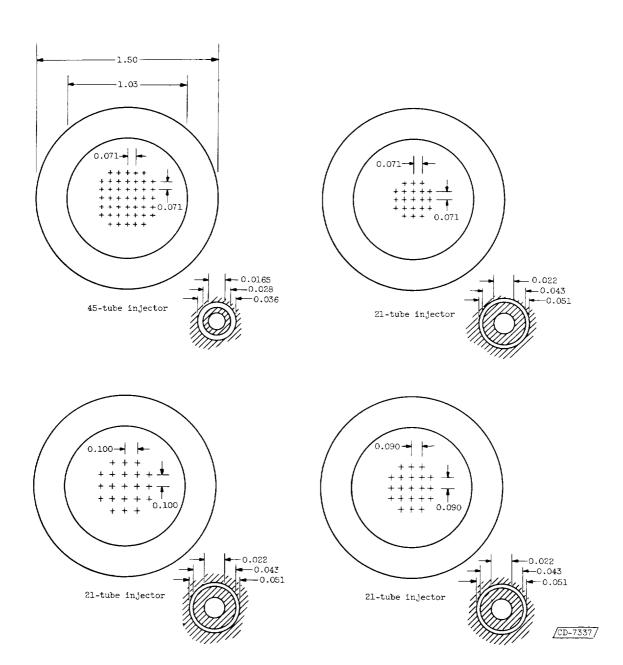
Injectors and assembly for 100-pound-thrust rocket motor. (Dimensions in inches.)
